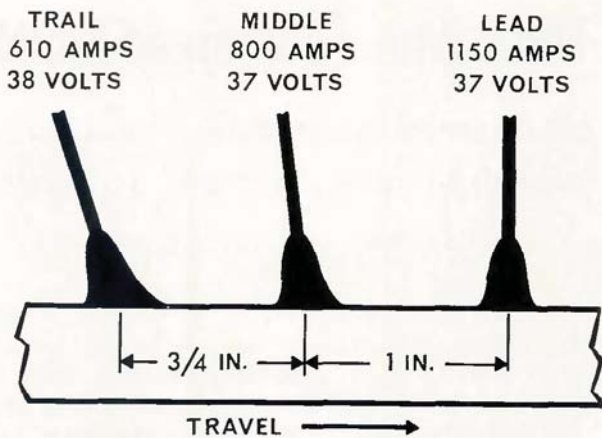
Typical welding parameters and wire alignment used with three wire system
